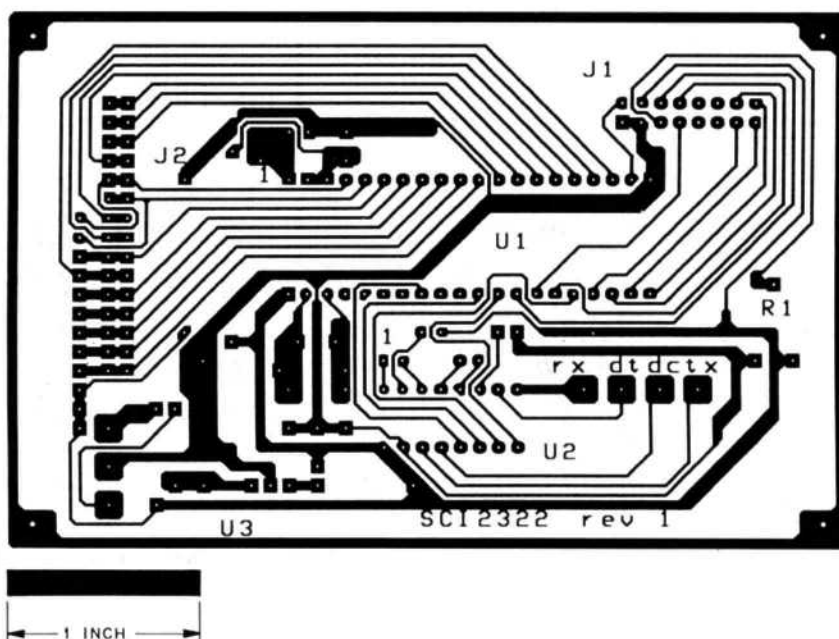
Etching pattern for the packet terminal shown from the foil side of the board.
